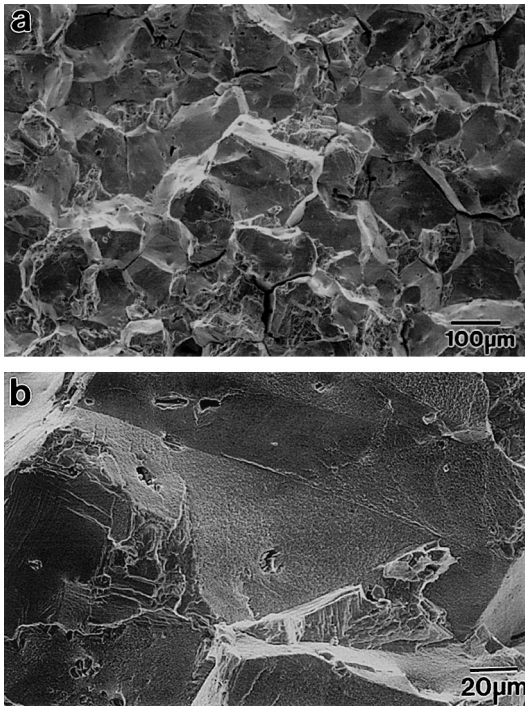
(a) and (b) Fracture surface of specimen tested in hydrogen gas at 338°C.
